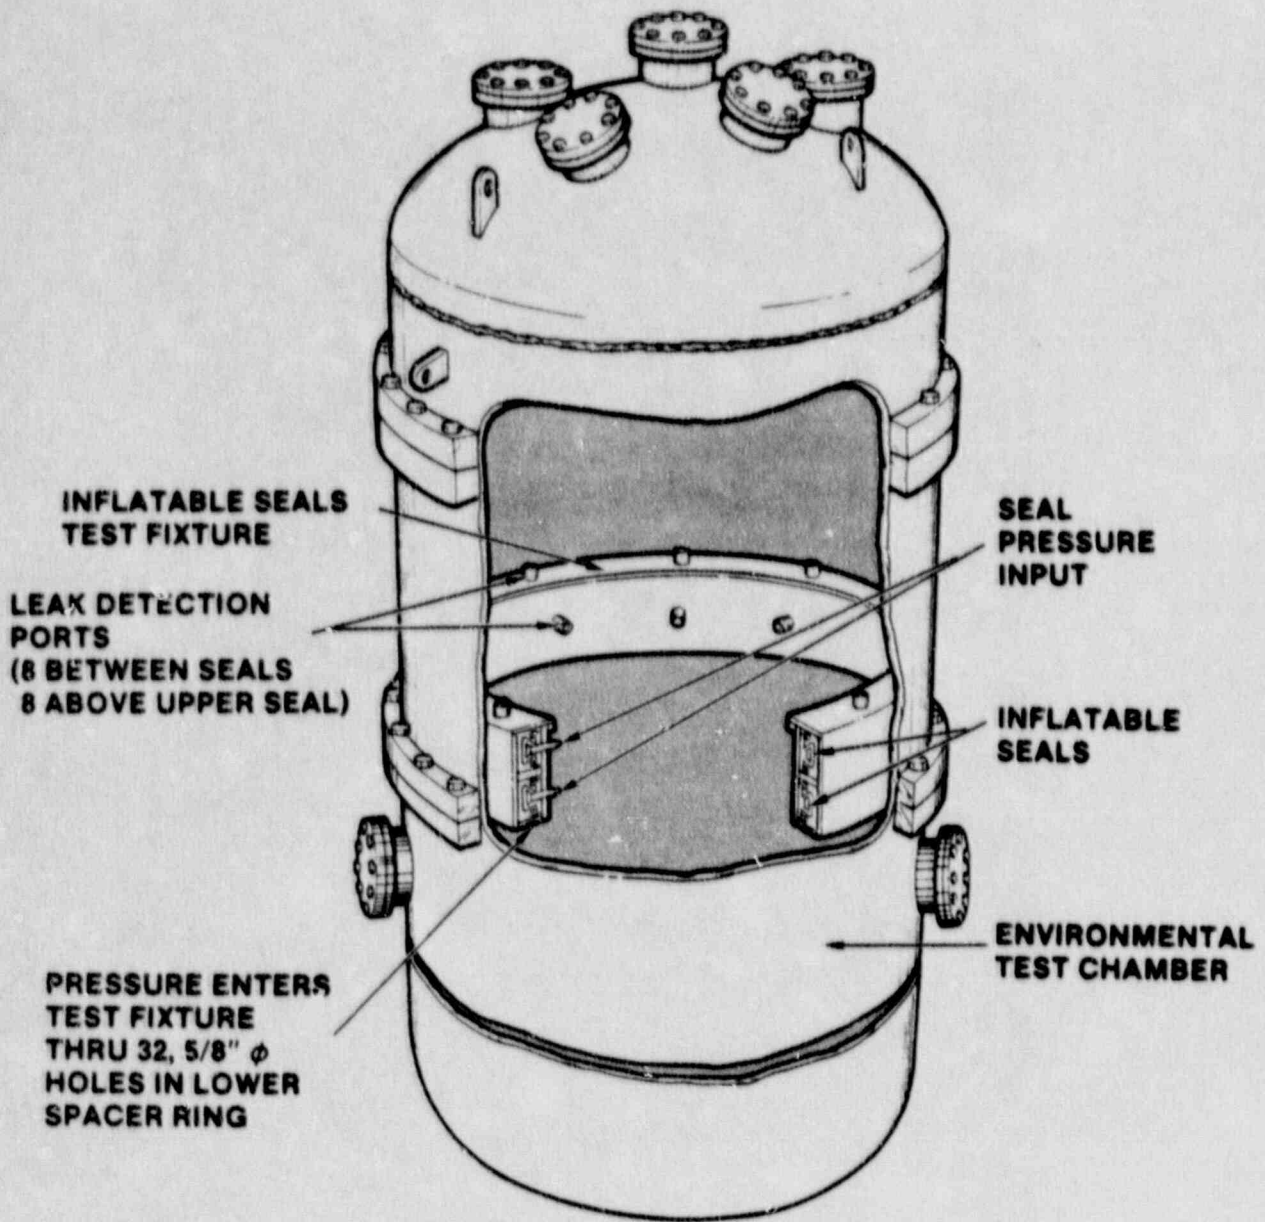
Cutaway View of Inflatable Seals Test Fixture Inside Environmental Test Chamber
